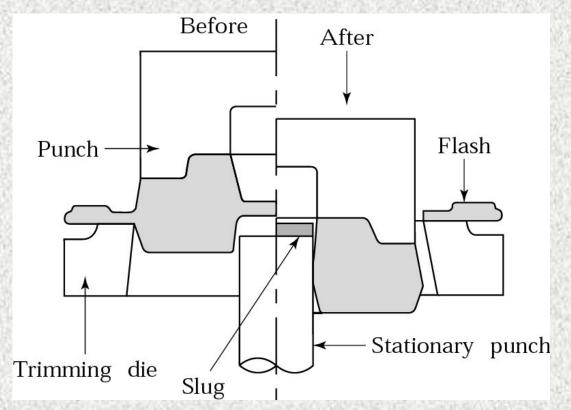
Trimming flash from a forged part. Note that the thin material at the center is removed by punching.
